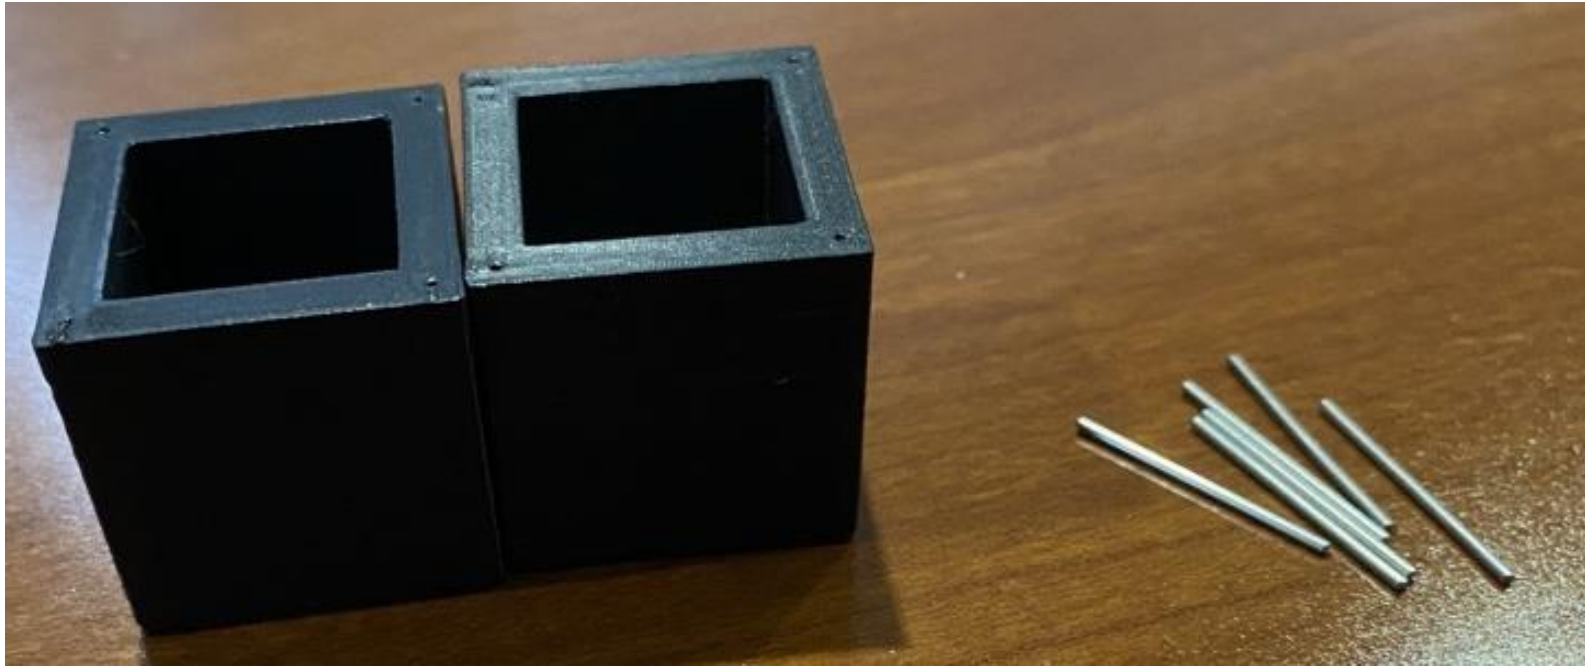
3D Printed Cubes and Pins to Evaluate Printed Hole Tolerances.
